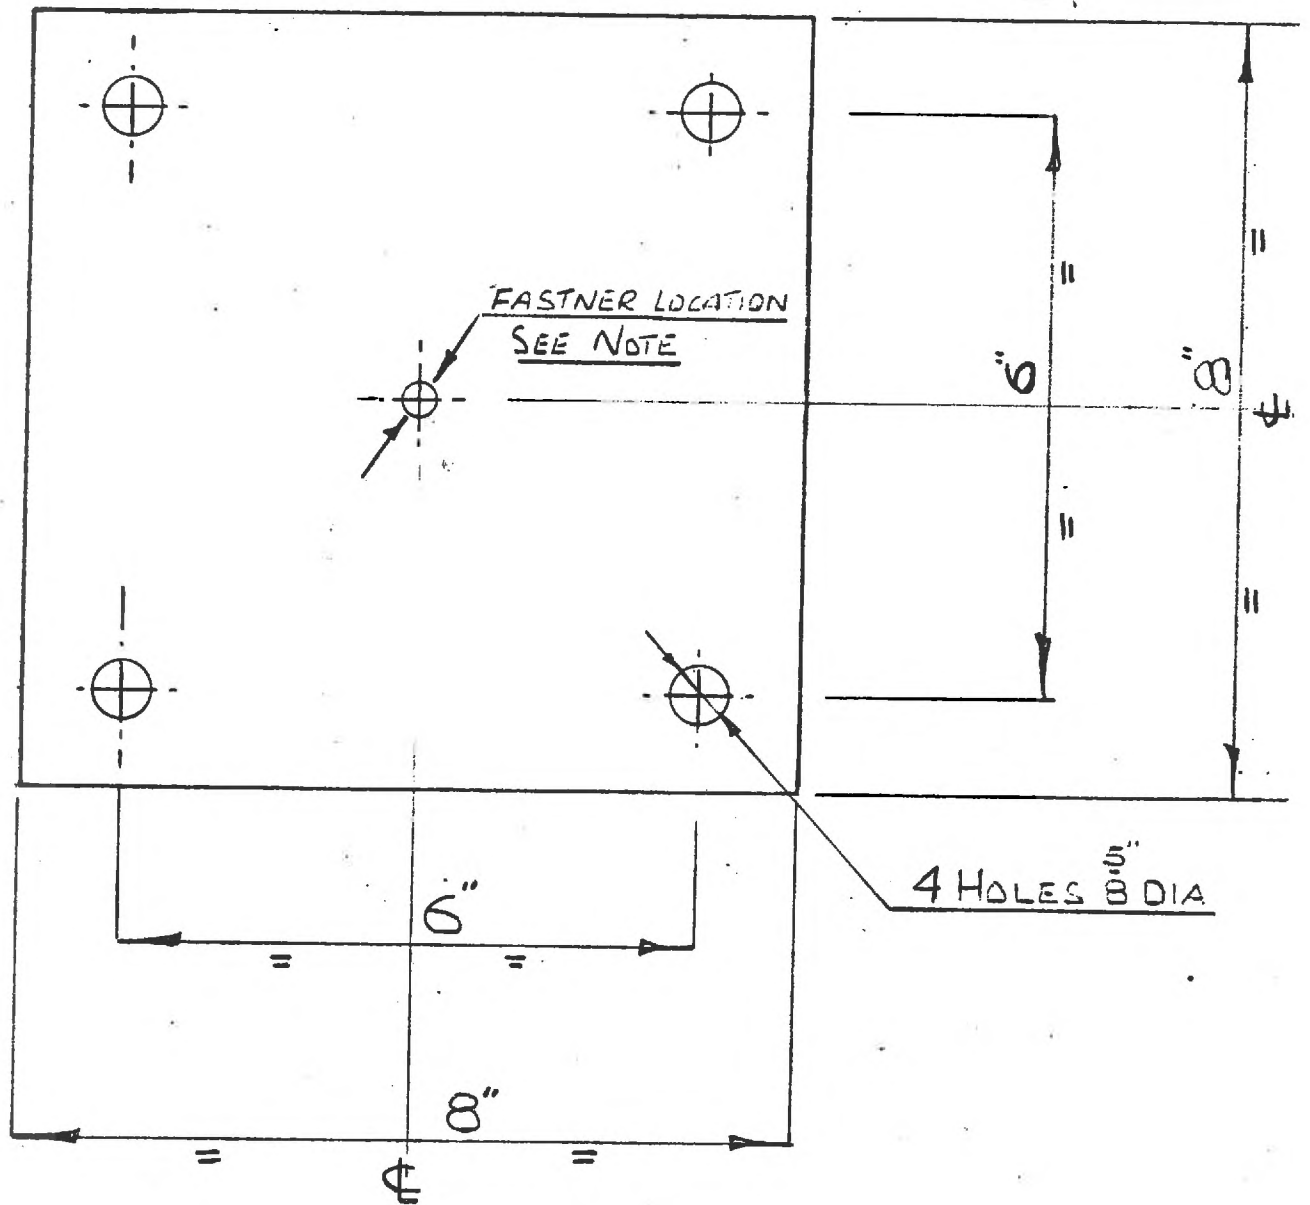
FIG. B-IV TEST SPECIMEN DIMENSIONS FOR
